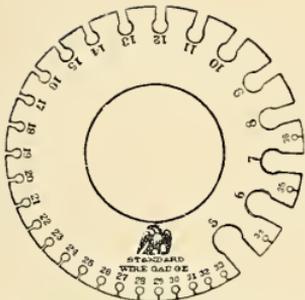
Gold Gauge-plate for Measuring Plate and Wire.
